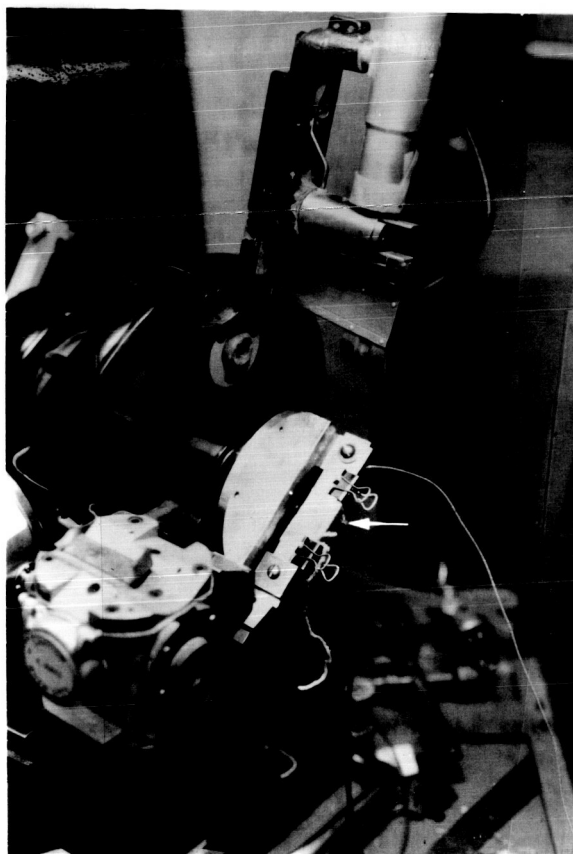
Specimen, marked by arrow, in place in x-ray machine.
